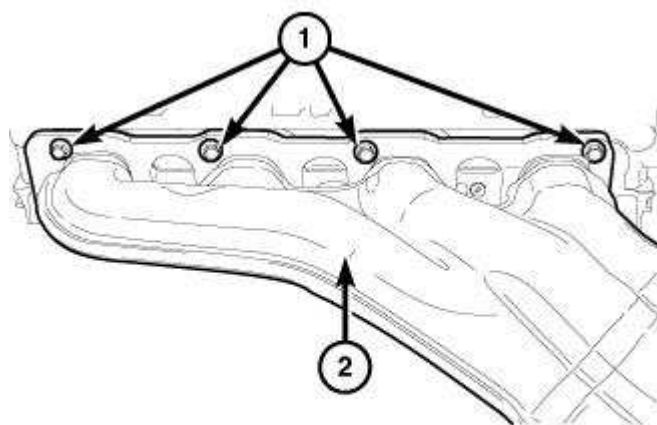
Exhaust Manifold Heat Shield & Bolts
